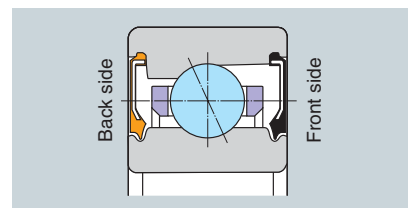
Standard grease-lubricated sealed angular contact ball bearings
